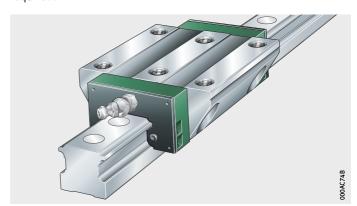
End pieces without upper relubrication hole KIT.KWSE..-..3
